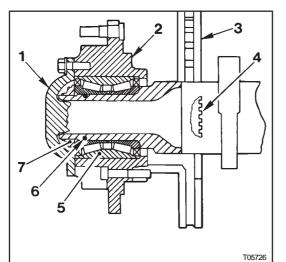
Section through wheel end of an axle with previous type "unified" bearing
